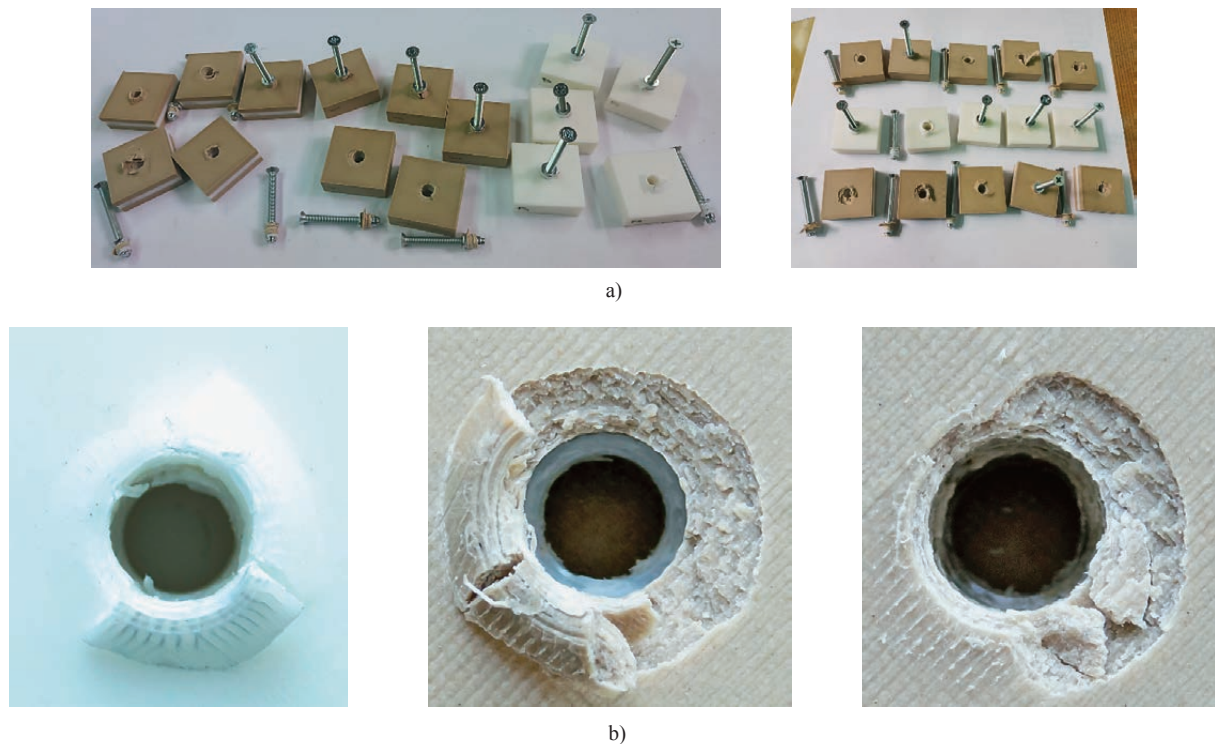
Failures caused by withdrawal force of double-threaded nuts: a) specimens without adhesive (left), specimens with adhesive (right), b) failures of PLA, WPLA+PLA, and WPLA material
